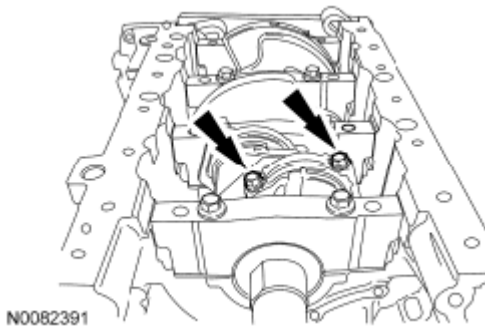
Locating Connecting Rod Cap Bolts & Cap
